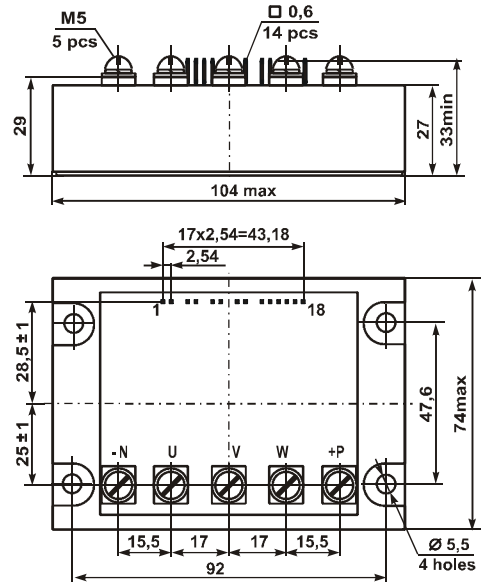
Overall drawing of modules M13A-30(50,90)-6(12)
